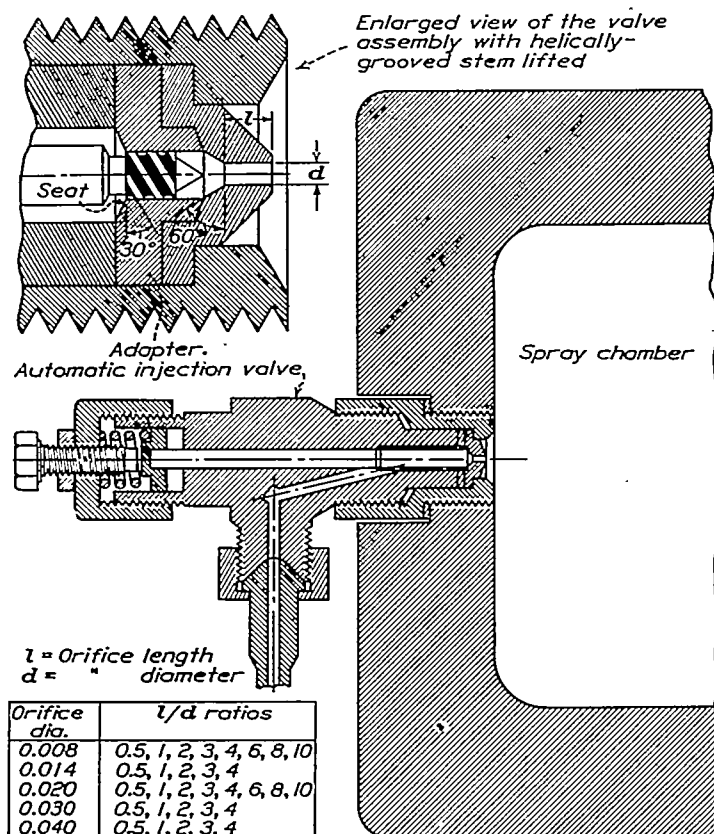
Injection valve assemblies. Orifice sizes and ratios tested
